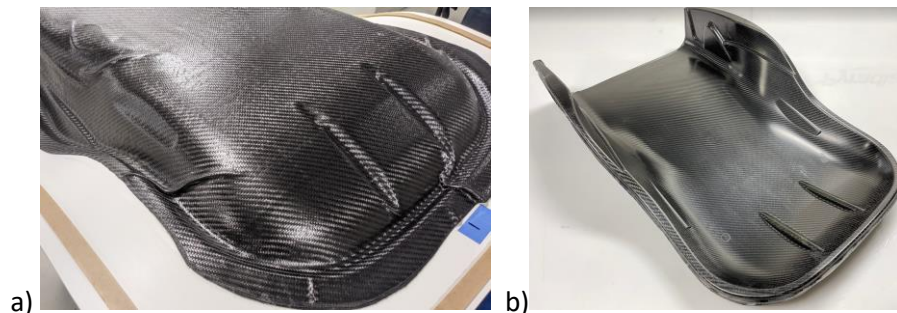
Prototype seat back part manufactured using the developed preforming and moulding processes: a) prepreg preform, b) consolidated component
